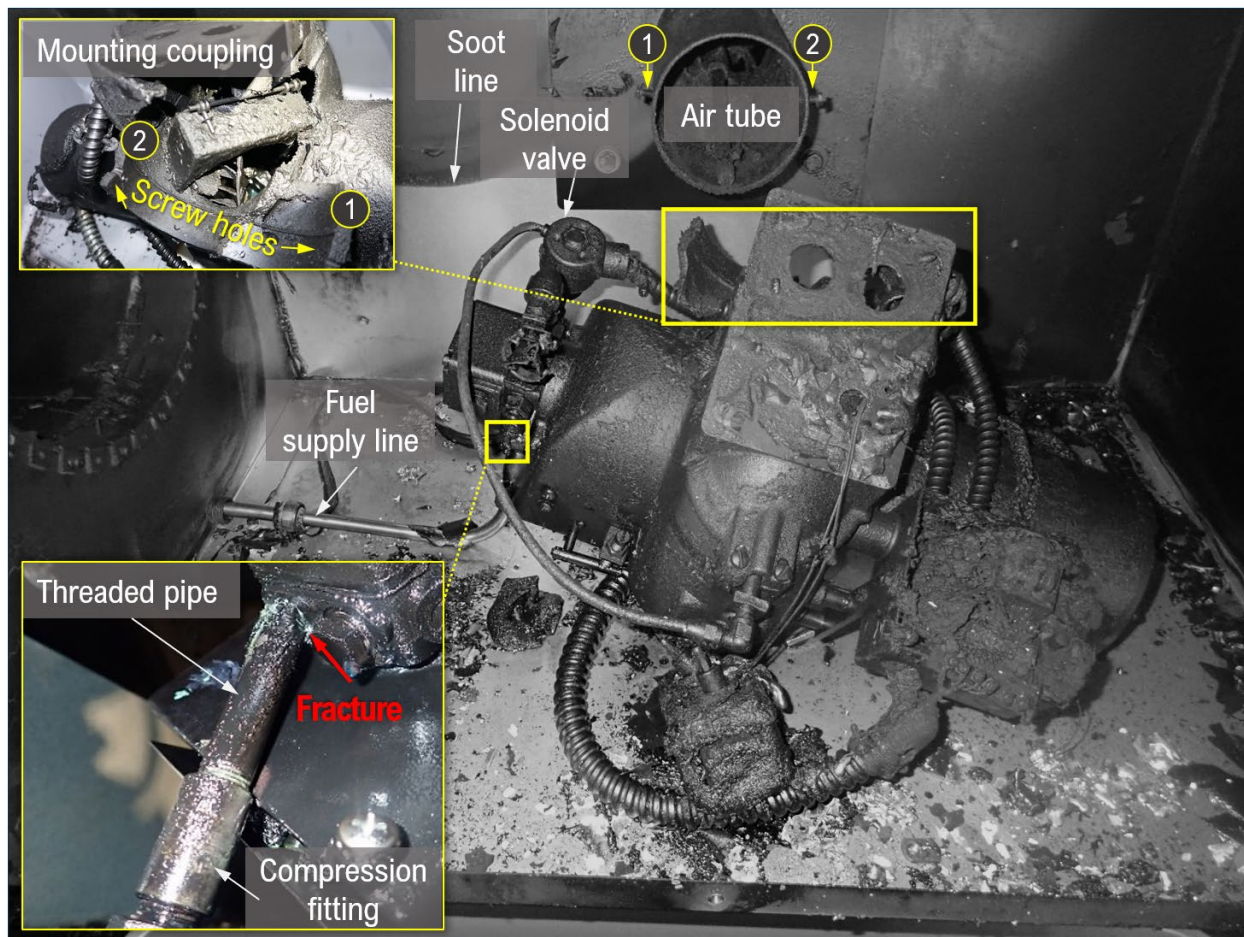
Photo of the fire-damaged burner detached from the air tube, lying on the bottom of the enclosure, shows the fracture point where the fuel supply pipe threaded into the burner assembly (*bottom inset*) and the fractured mounting coupling (*top inset*, interior view). (Source: Coast Guard)
